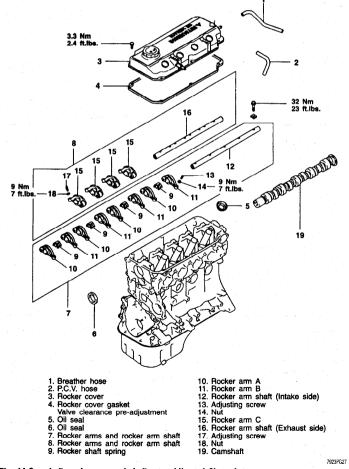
Camshaft, rocker arm and shaft assemblies-1.8L engine
